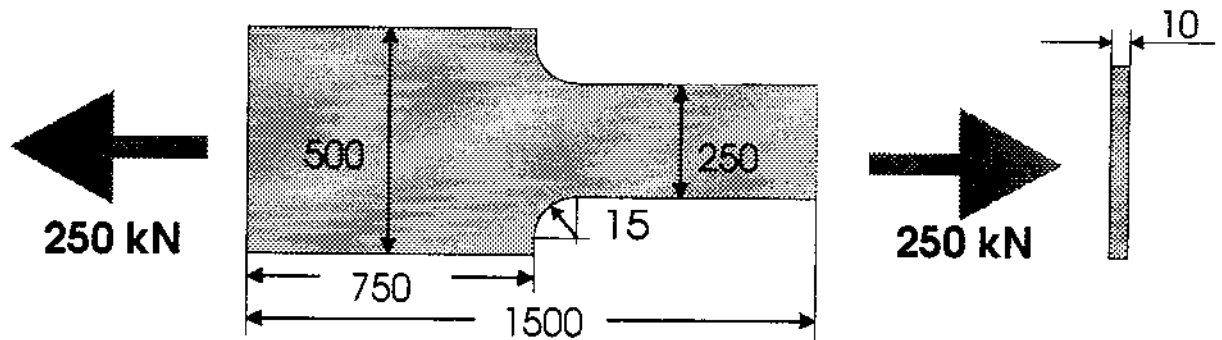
Geometry and Dimensions for Plate *with* Shoulder Fillet (Axial Force)
